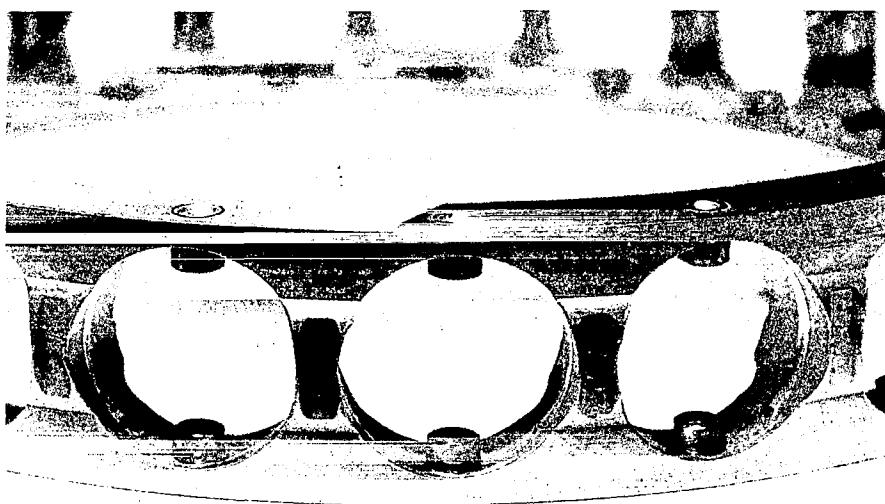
Appearance of Cage OD Surface, Pin and Ball Pocket Wear — Drilled-Ball Bearing S/N 2600A-1
